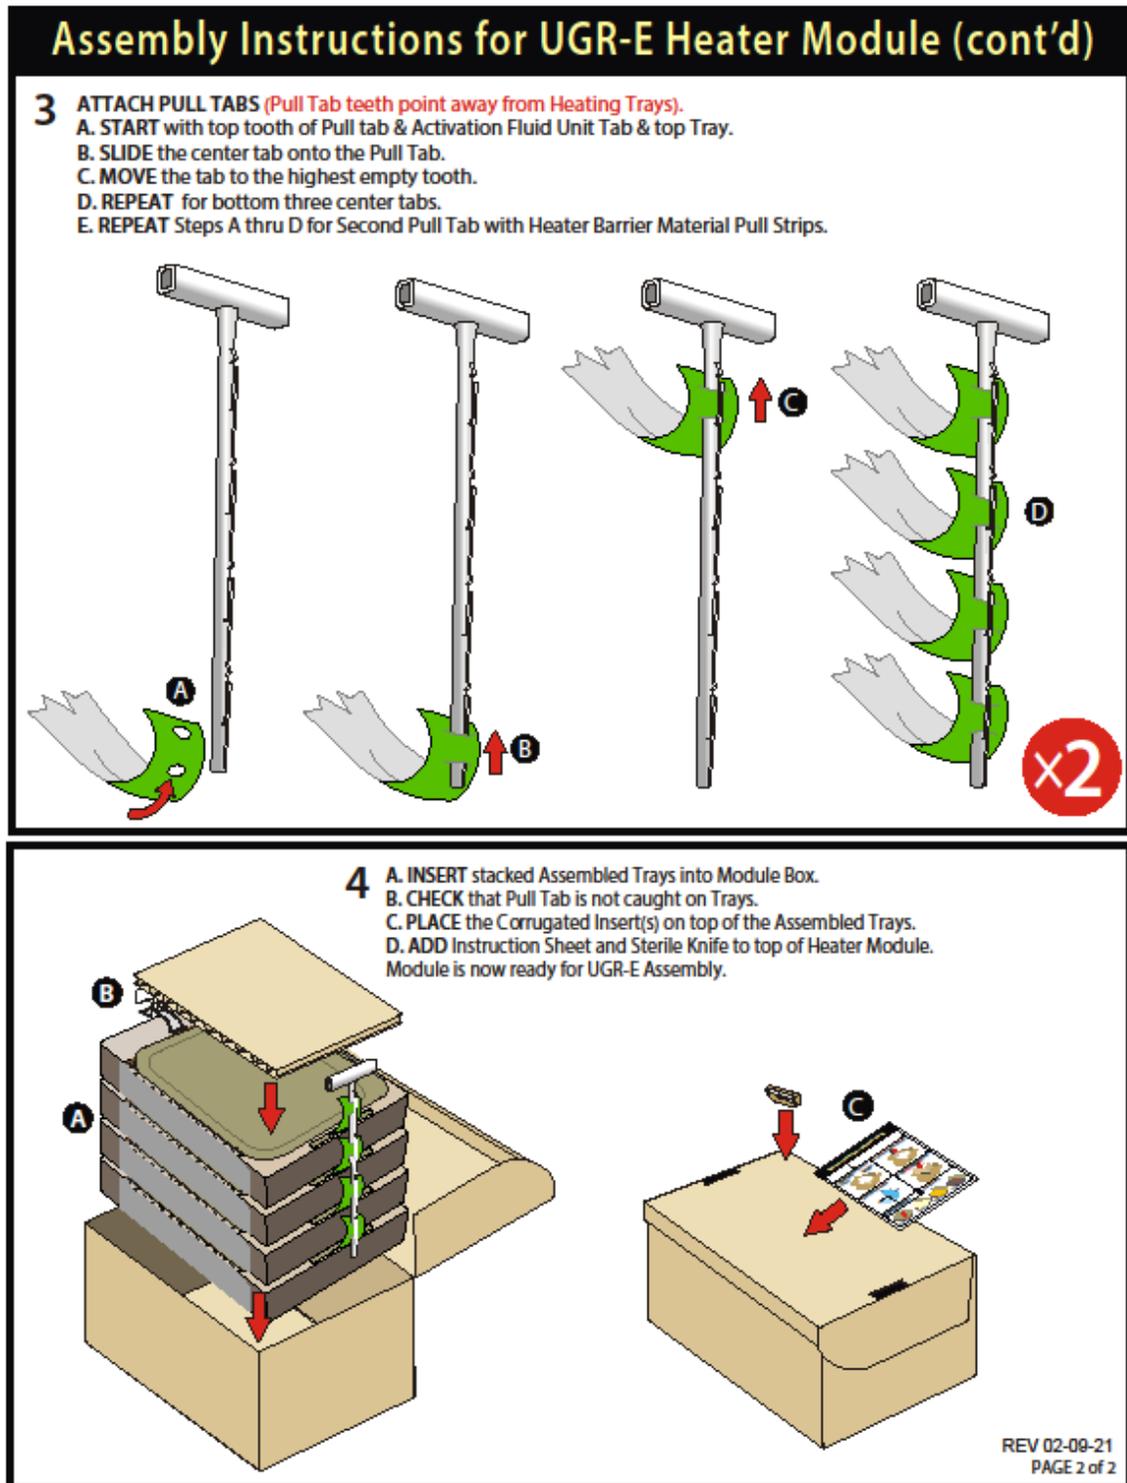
Assembly Instructions for UGR-E Heater Module – Continued
